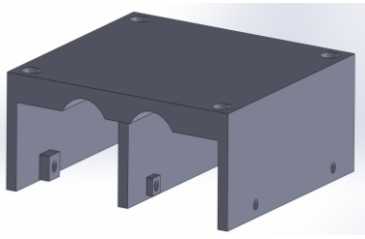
CAD model of final chassis design. The motors fit perfectly in the semicylindrical section. The square bumpers add extra support for axles and keep the spur gear and wheel in place
